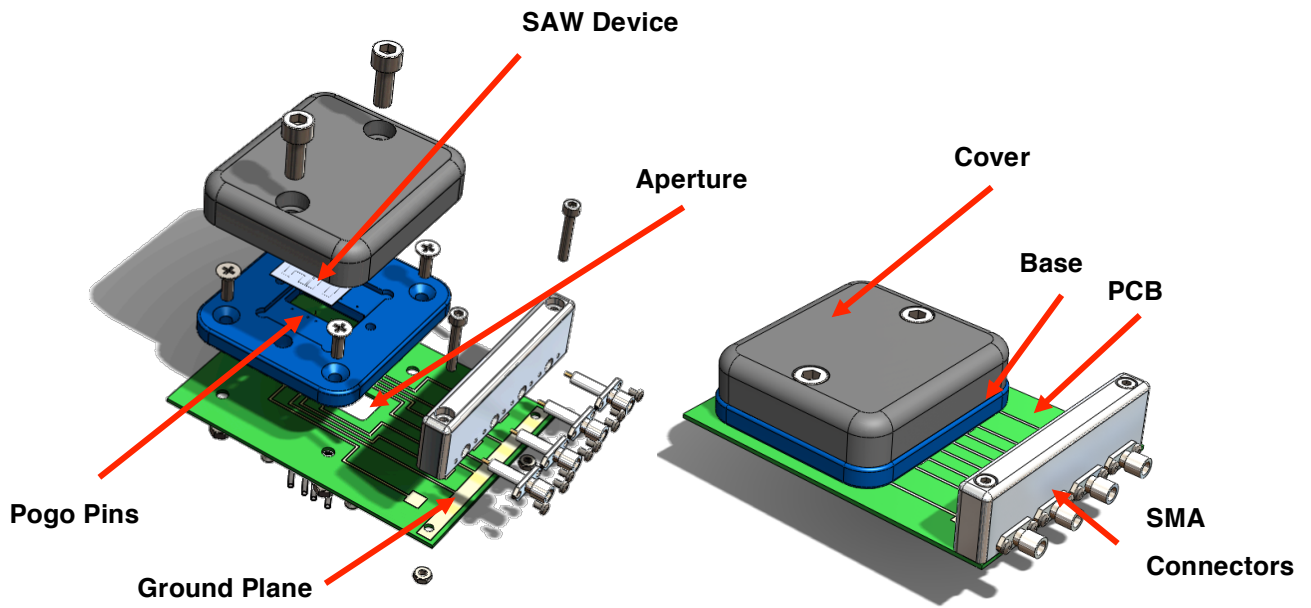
SAW Sensing jig (a) Left image is explode view of components (b) right image is assembled jig
